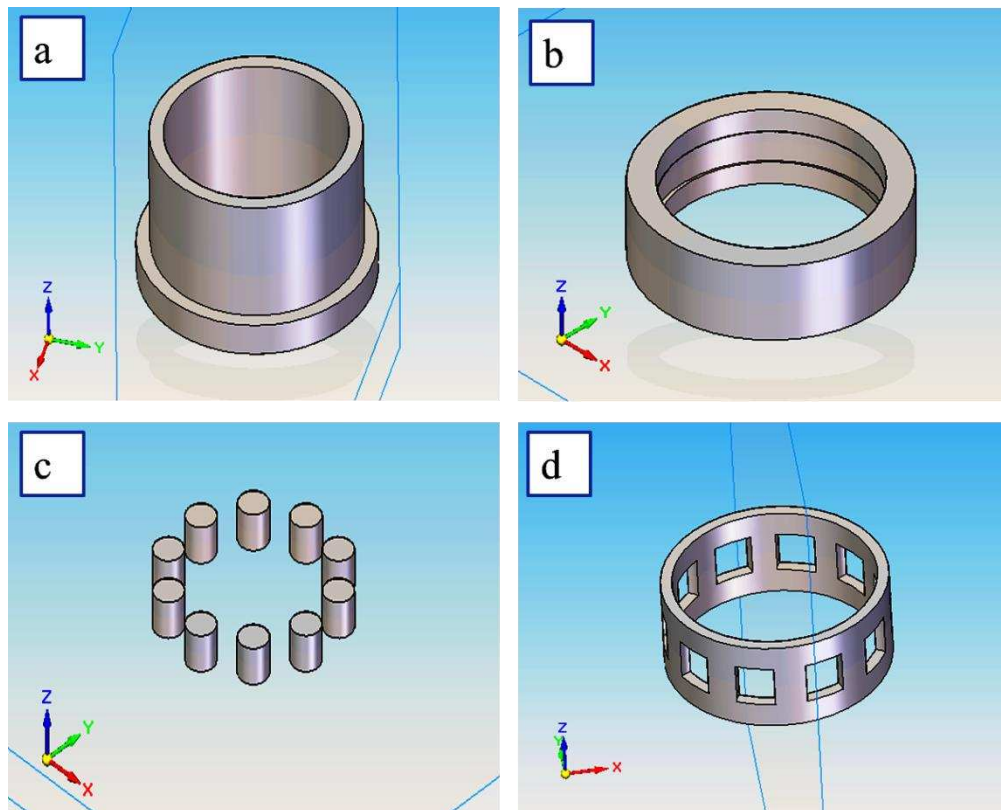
CAD model for different parts of Cylinder Roller Bearing
